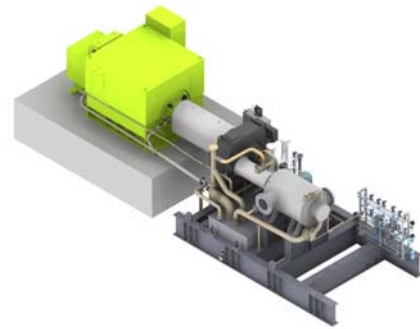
Typical Motor Driven Compressor Train incl. Intermediate Gear.
